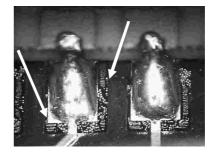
Examples of good solder joints (left) and bad solder joints (right). The right photo shows that the wetting of the pads is not sufficient and that the reflow temperature was to low and leaves solder balls around the pads.
